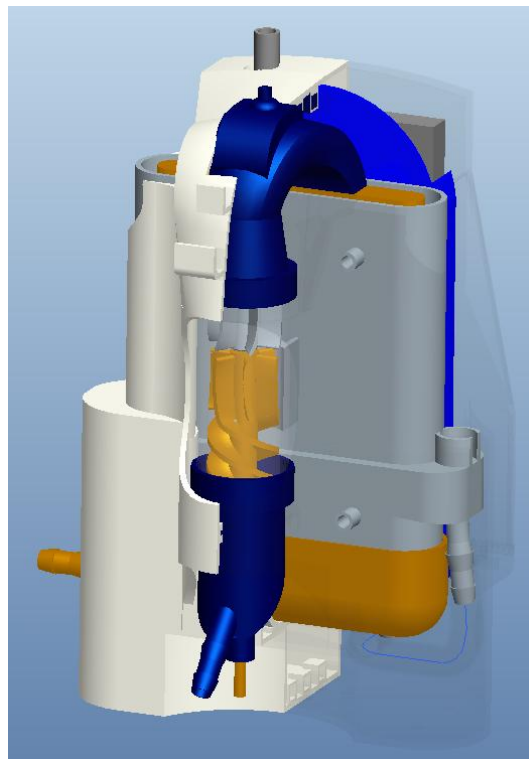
ProEngineer assembly of the miniaturized and integrated ECMO prototype.
